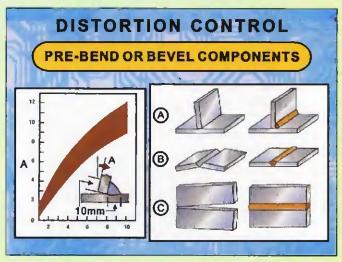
Presetting components by an offset angle to compensate for weld shrinkage.
